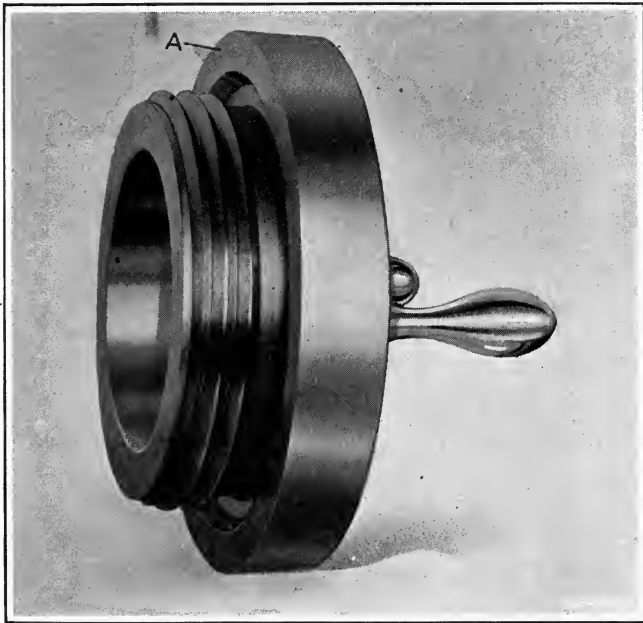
Qualifying Gage for inspecting the Breech Mechanism of a Large Gun
